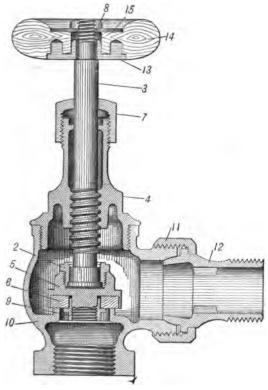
Steam Radiator Valve—Angle Pattern (Jankins Bros.).
